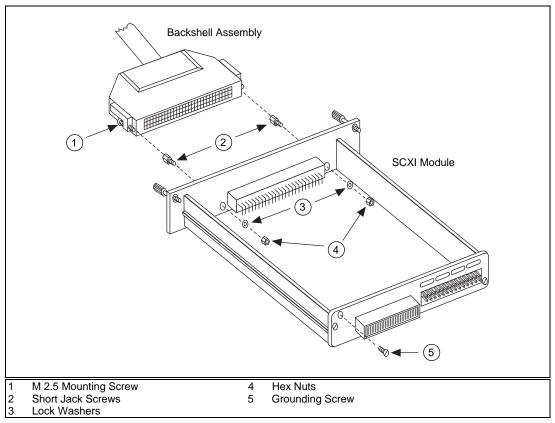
Connecting the SBS-96F Backshell Assembly to the SCXI Module
